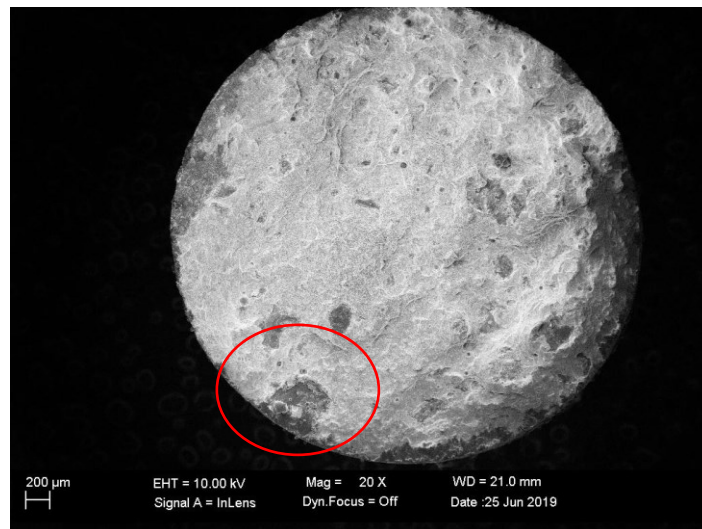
24 hour air cylinder #6 fracture surface
